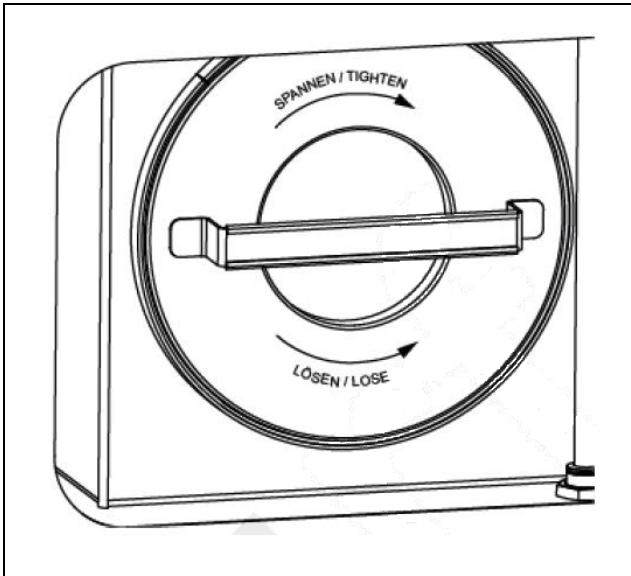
Unscrew stage 1 elements and replace with new original elements. Tighten elements hand tight
